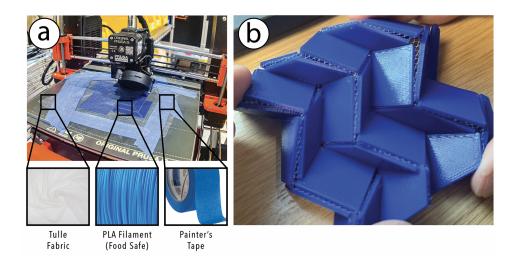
(a) The printing process using tulle fabric, PLA filament, and painter's tape to produce a mold that consists of rigid plastic pieces connected by flexible fabric. (b) A printed Miura mold.
